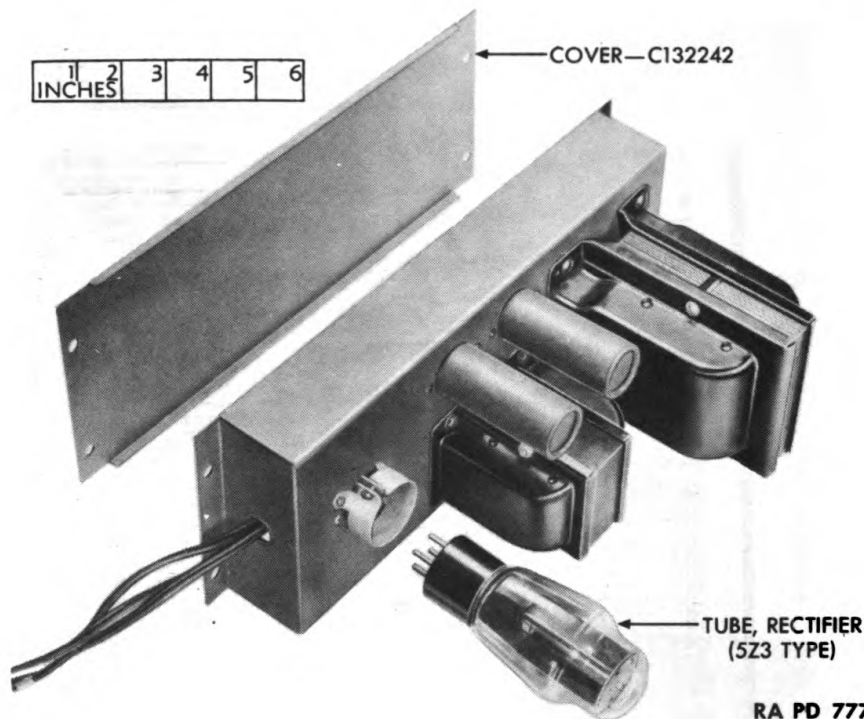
Removal of Rectifier Tube and Chassis Cover From Power Pack
